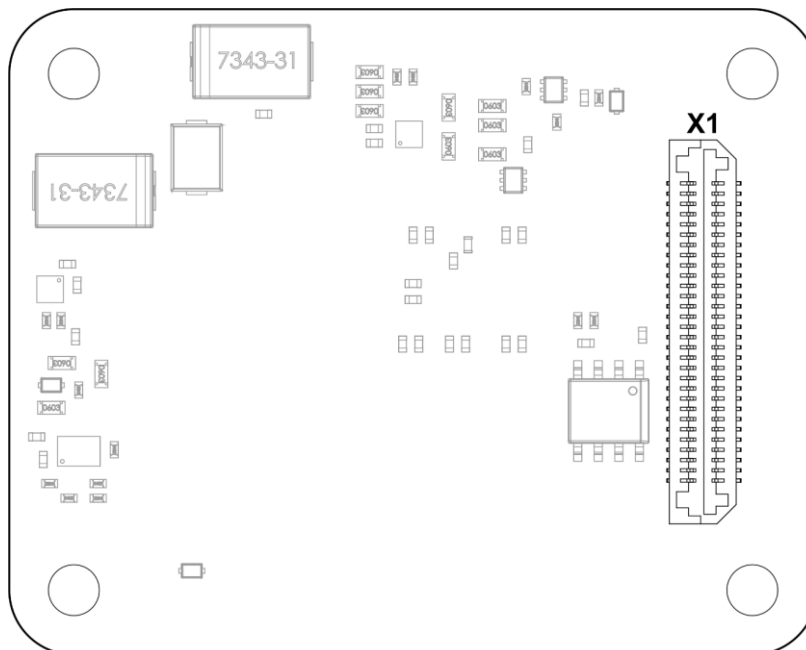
Toradex DSI to LVDS Adapter – Bottom Side
